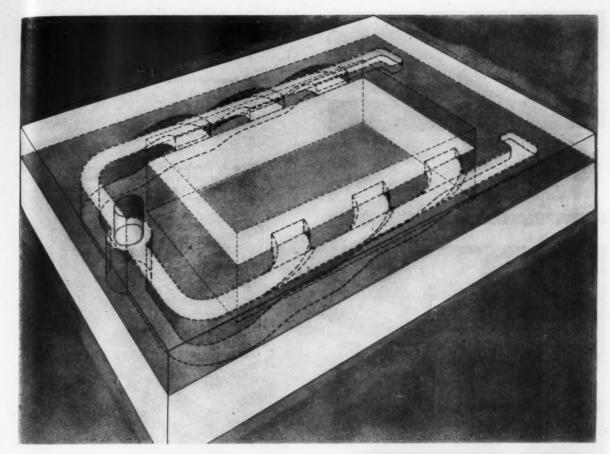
Simplified drawing of Mold C shown in greater detail by Fig. 10. The three sprues illustrated by Fig. 32, 33 and 34, fit this mold. The runner is in the drag and is 2 in. deep and ¾ in. wide, but as each gate is passed, the cross-sectional area of the runner is reduced by the area of the gate, thereby equalizing the flow through the gates. Since cross-sectional area of the gates is ½ sq in., depth of the runner is reduced by 2/3 in. at each gate. It will be noted that the ratio of cross-sectional area of the bottom of the sprue, runner, and gates in this instance is 1:4:4 when the area of the sprue is ¾ sq in. as illustrated by Fig. 33.
